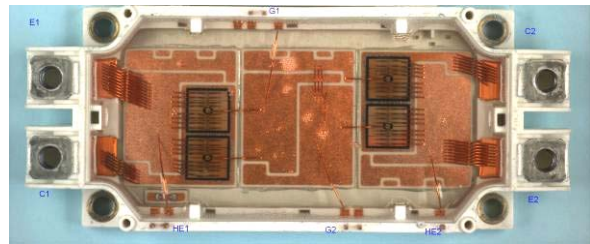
Test specimen with Cu bonding, diffusion soldering and high reliability system soldering.
